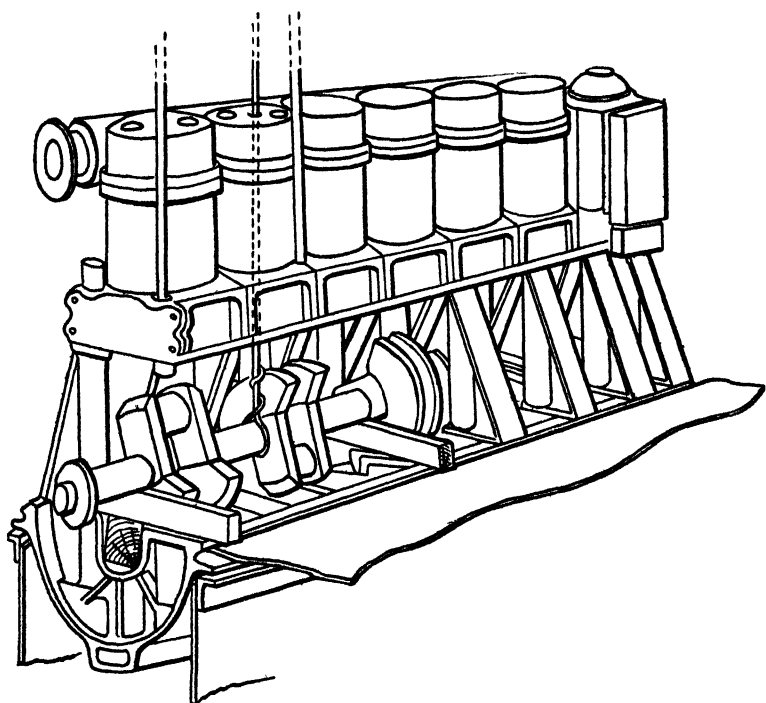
Method of Removing Crankshaft from Busch-Sulzer
